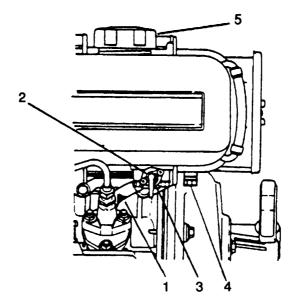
Replace/Service Fuel Cock and Fuel Filter
